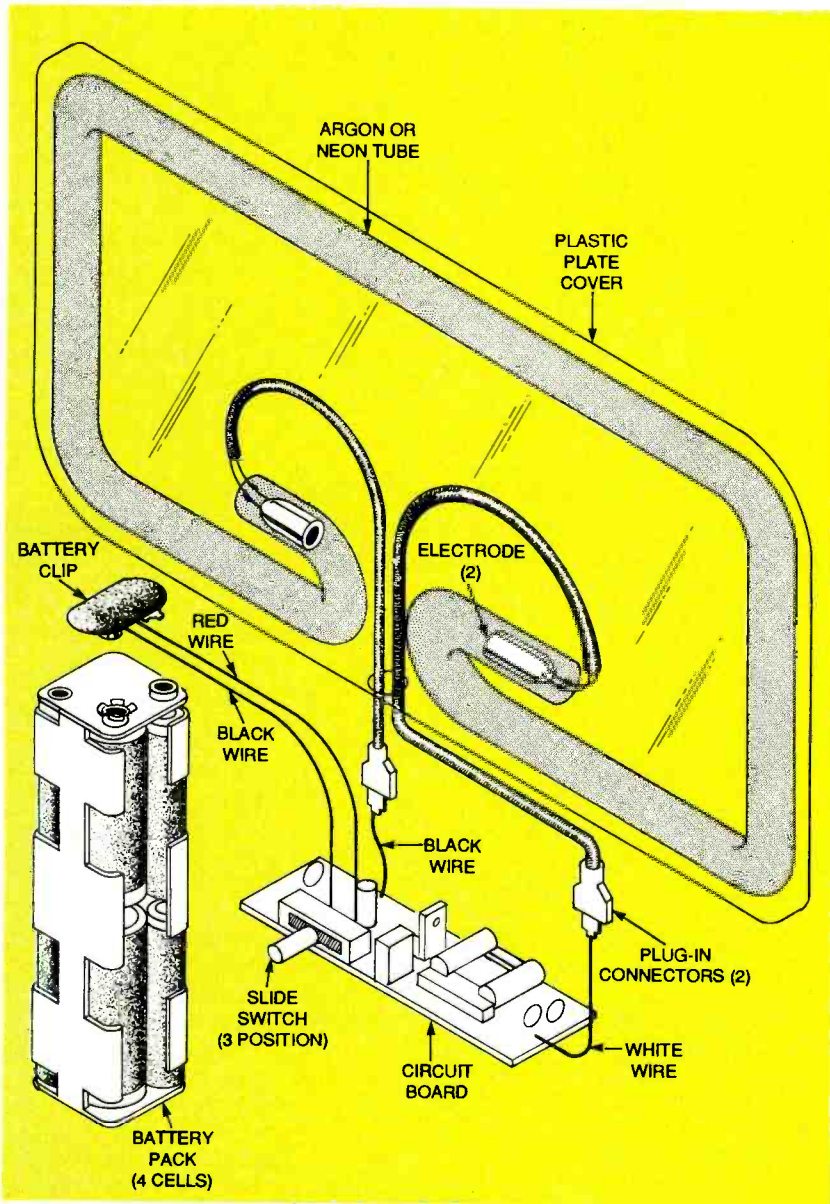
NEON OR ARGON GAS TUBE LICENSE PLATE frame system showing driver circuit connections to the gas tube/ cover assembly.
